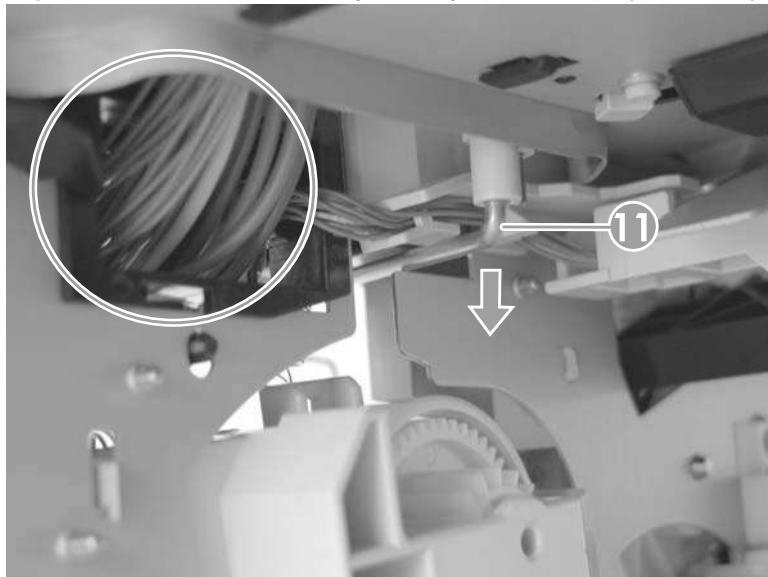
Remove the high-voltage power-supply assembly (6 of 8)
